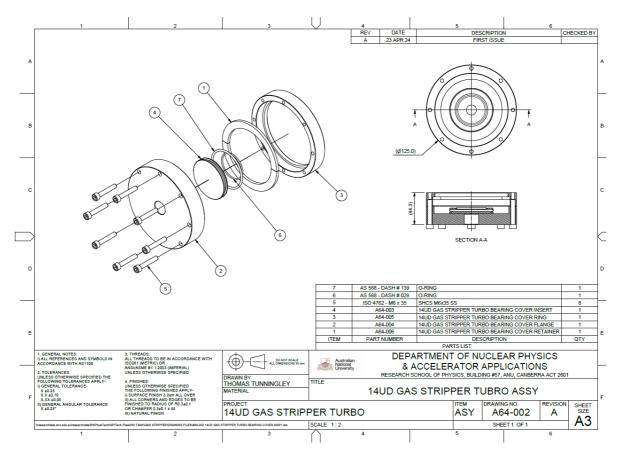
Assembly of modified bearing cover and clamping rings (A64-002)
